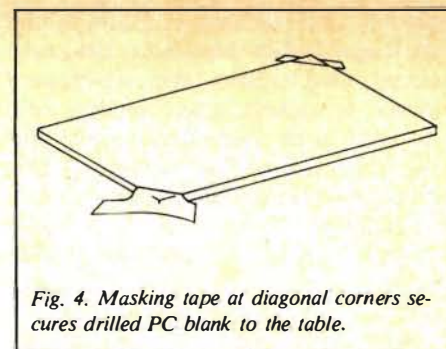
Masking tape at diagonal corners secures drilled PC blank to the table.
